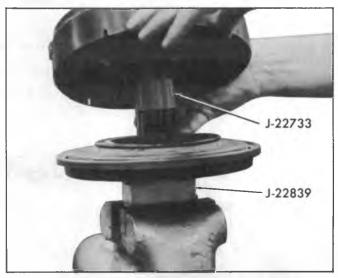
C-Installing Seal Protector Using Tools J-22733 and J-22839
